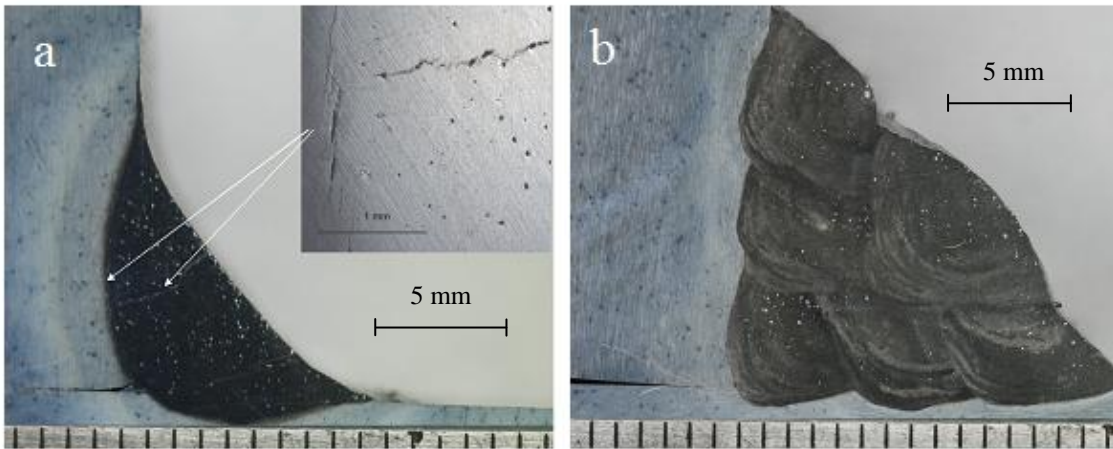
Single Al-5556 wire welds showing cracking 75b. Weld #4, 3 wire weld Al-Cu-Mg – no cracking
